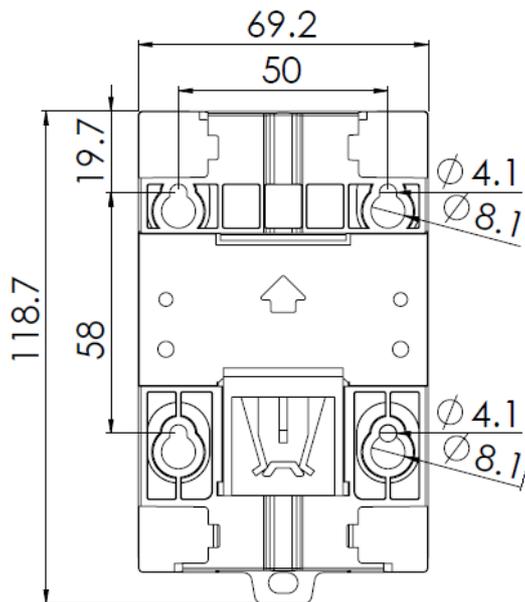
WISE-4000 Series Mount Kit Dimensions
